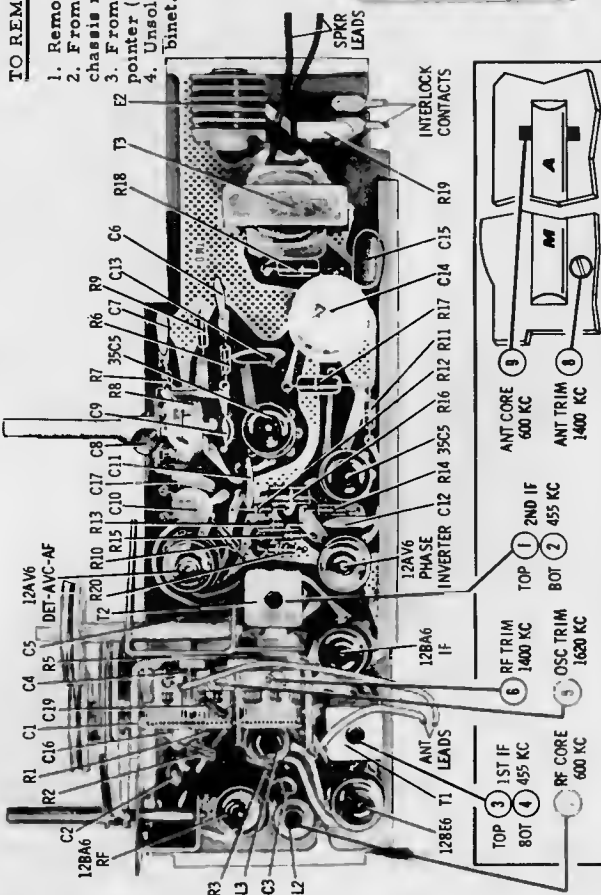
PLATED CHASSIS BOARD WIRING AS VIEWED FROM BOTTOM
